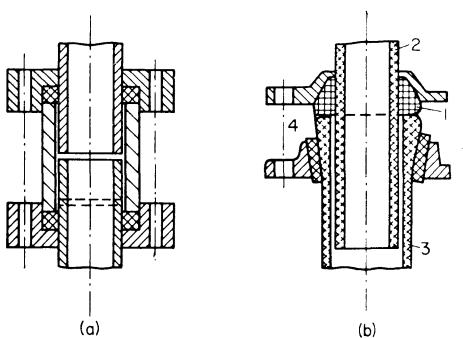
Pipe-to-pipe joints; (a) with two cylindrical compression seals; (b) with a single gasket having a cylindrical seal towards one of the pipes and a plane seal towards the other pipe (after Q.V.F.¹⁰²¹)
